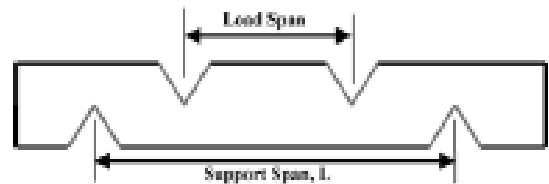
Fixture Used to Align Loading Noses and Supports
